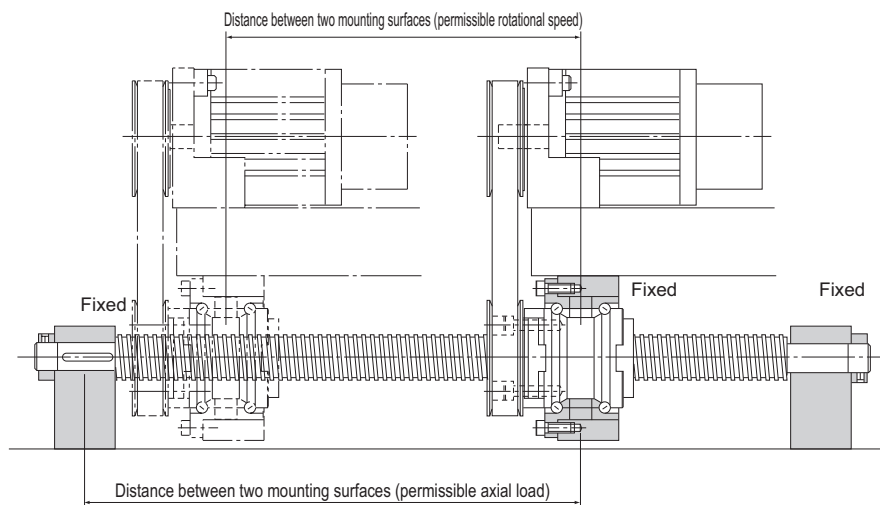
Screw Shaft Mounting Method for Rotary Nut Ball Screw: Fixed - Fixed
